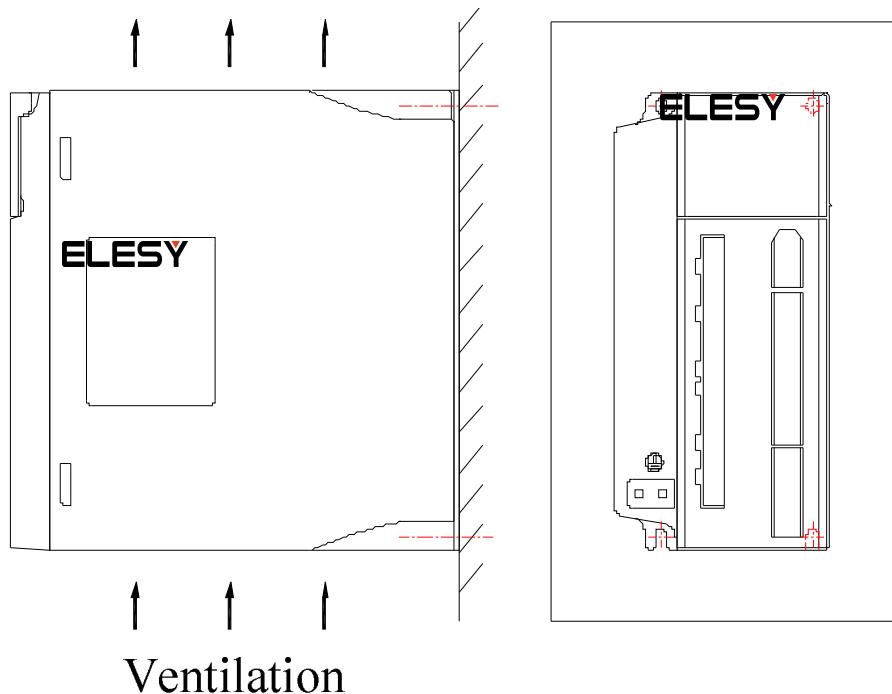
the driver's structure and installation dimension (unit: mm)
